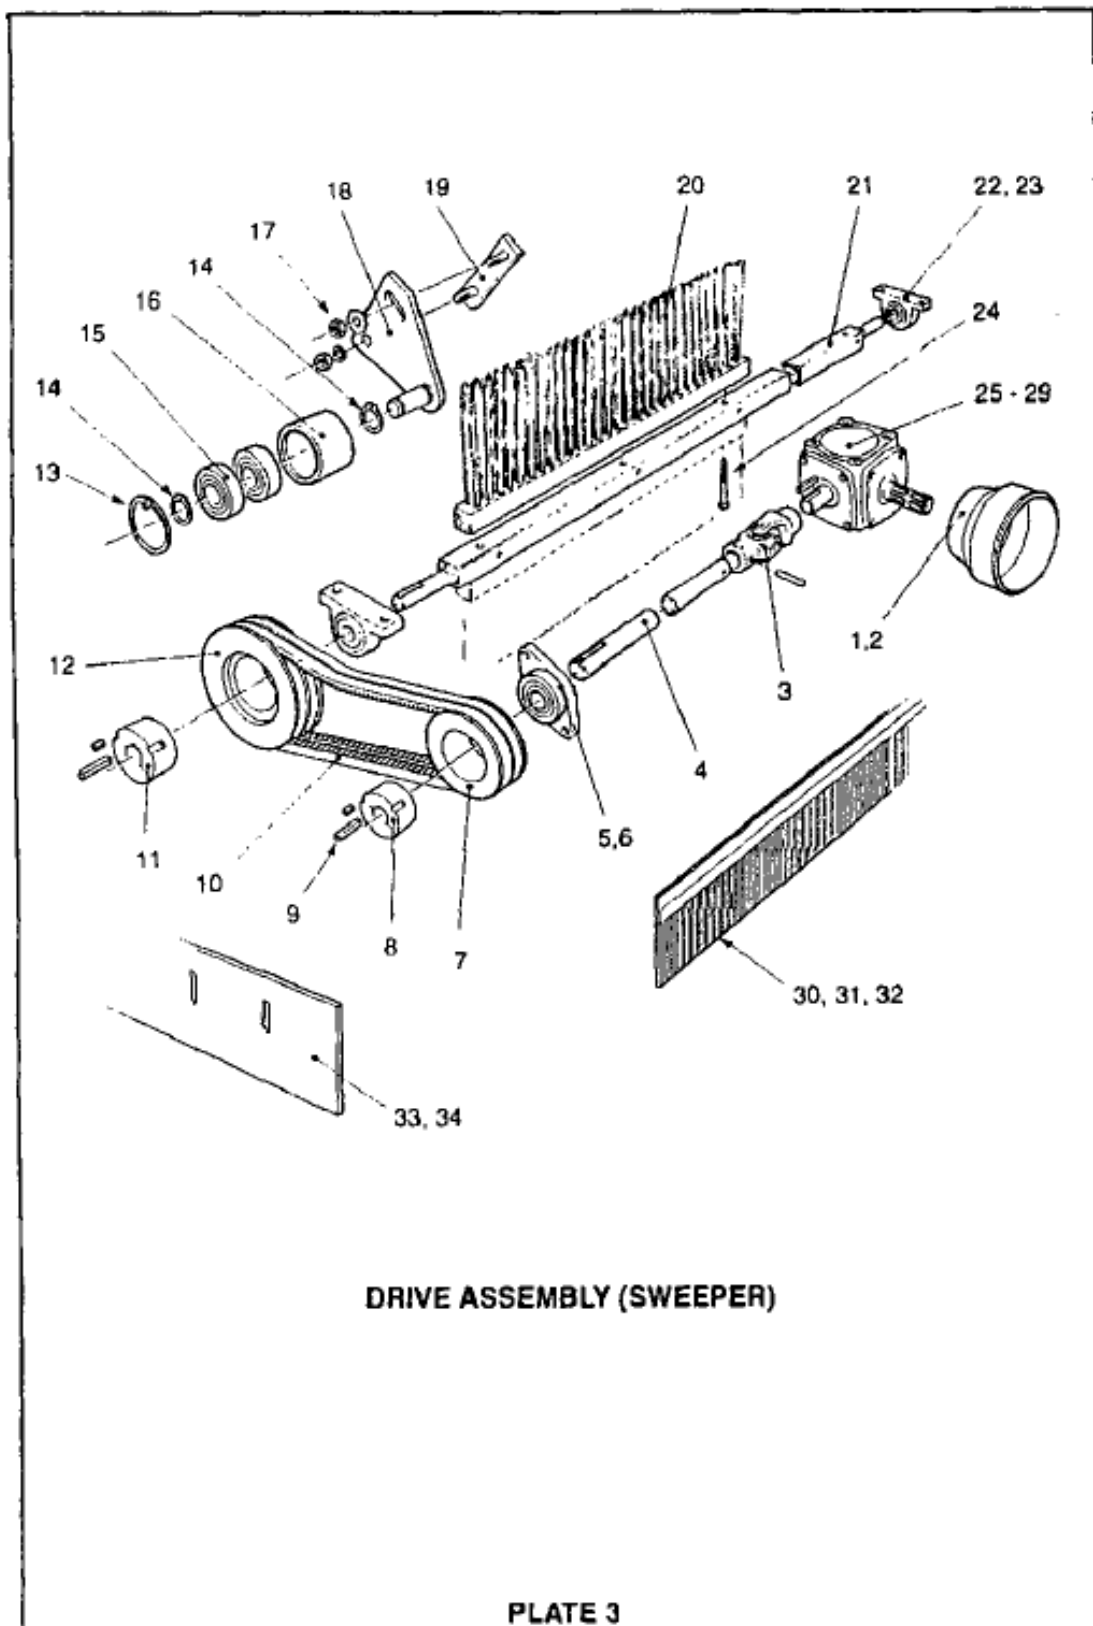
STX120 DRIVE ASSEMBLY (SWEEPER) PARTS LIST
